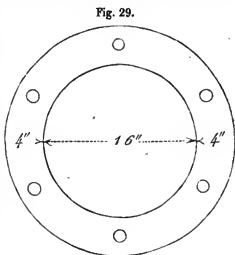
is a front elevation of the retort, showing the thickness of the part to which the mouth-piece is bolted, and also the bolt-holes, an inch and an eighth diameter.
